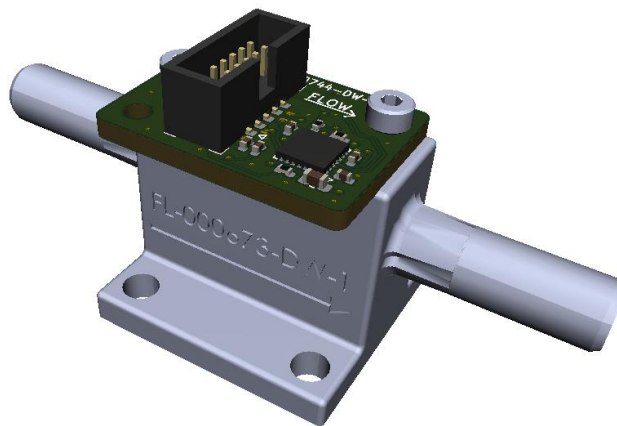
The FLS110 sensor module installed into a fluidic test fixture
